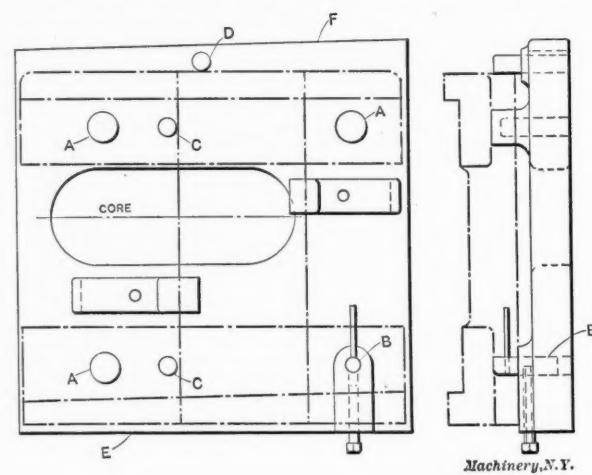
and 171. Lathe Carriage and Fixture for Rough Planing Ways.
